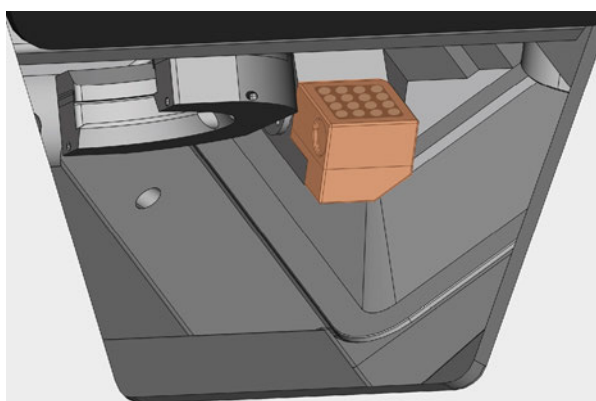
TOOL MAGAZINE IN THE WORKING CHAMBER (MARKED ORANGE)
